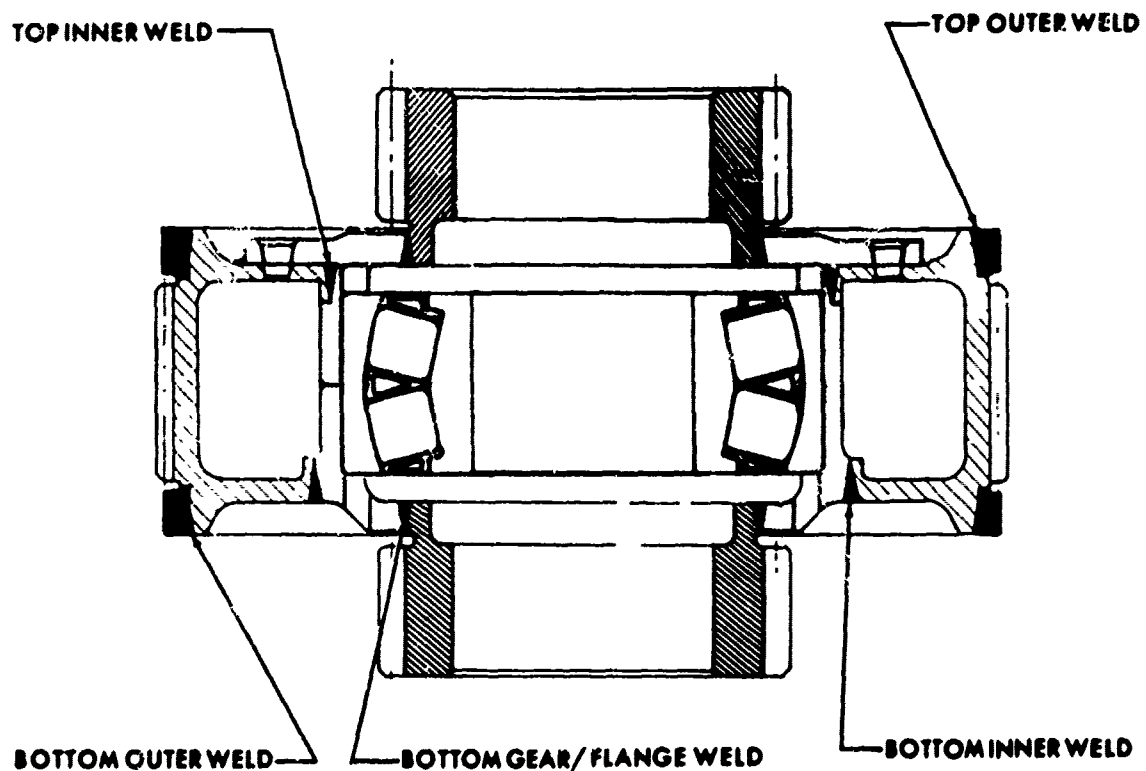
Electron-Beam-Weld Locations, Second-Row Gear
